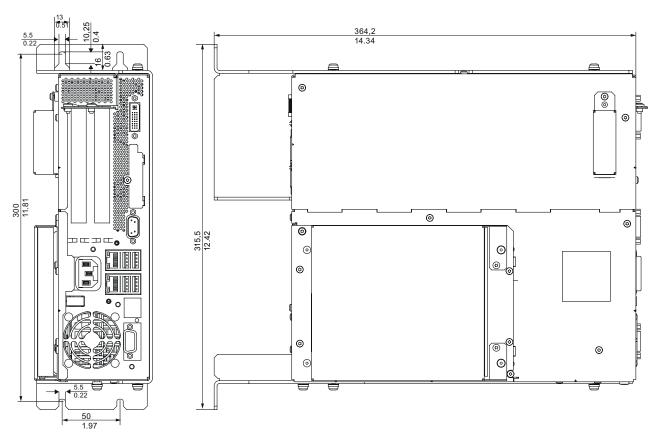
Dimensional drawing for installation with the vertical mounting kit for PC port access from the front
